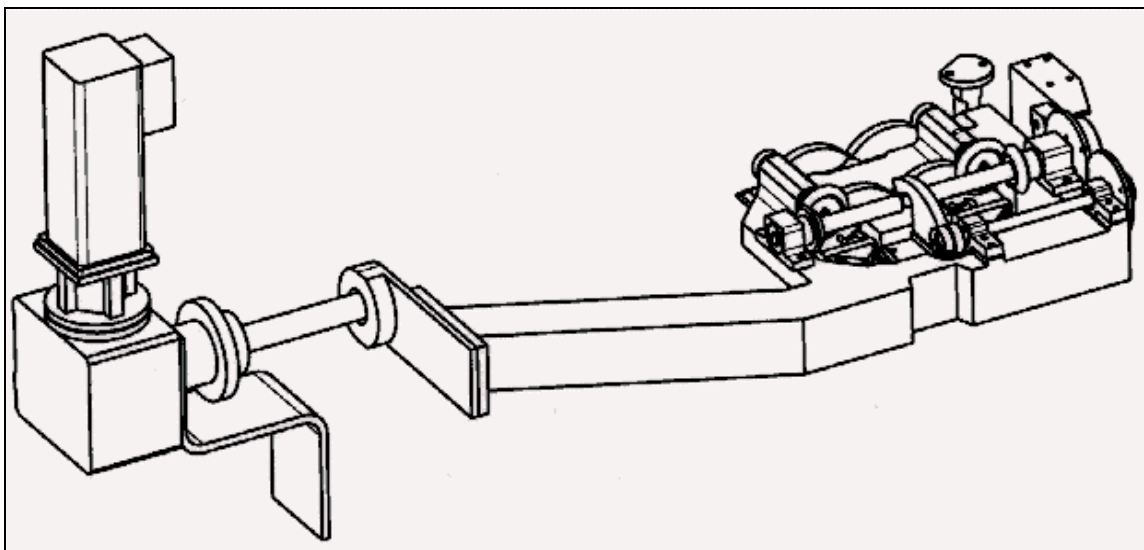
CAD model of subsystem in packaging machine (from Tetra Pak)
